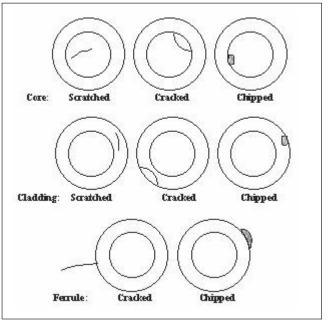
Examples of Scratched, Cracked and Chipped End Faces Shown in Core, Cladding and Ferrule Surface Areas
